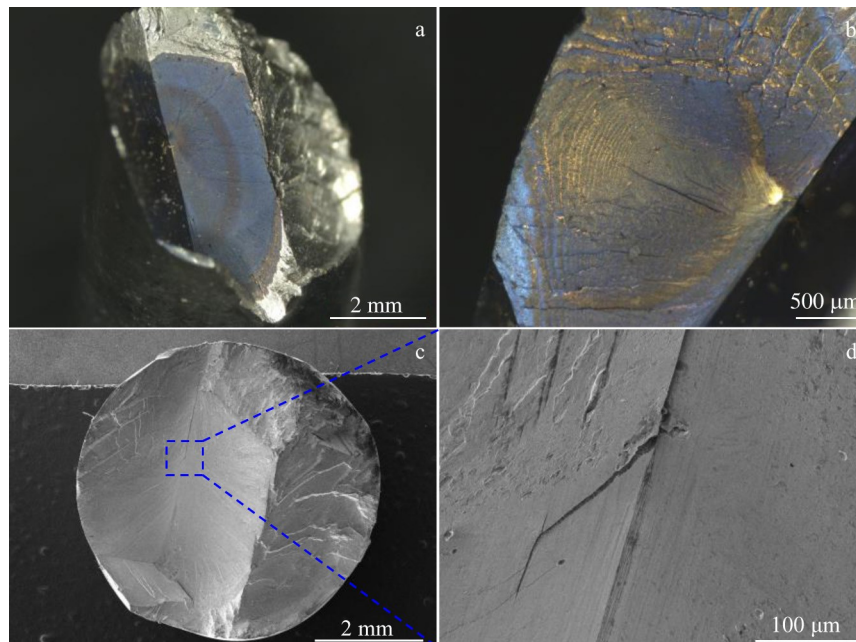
Fatigue crack initiation in the internal of the specimen ($\Delta\varepsilon/2=0.5\%$)
